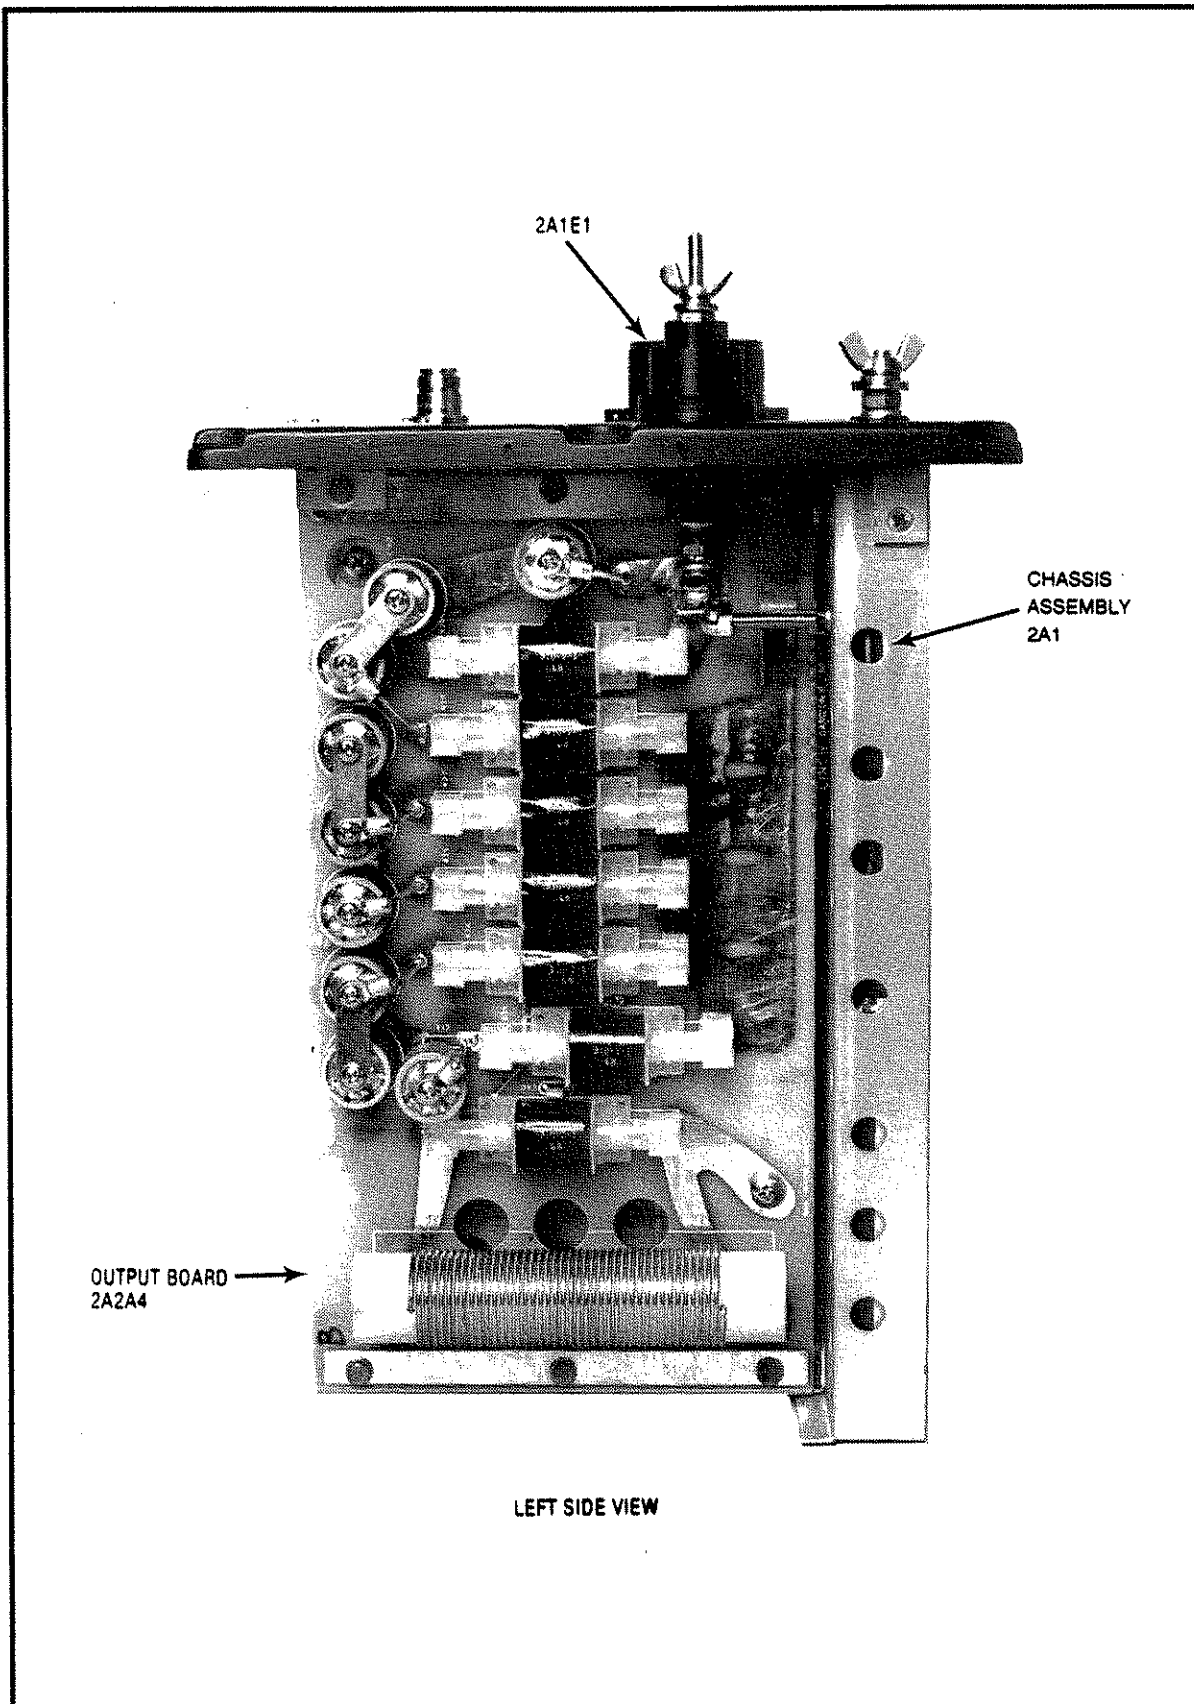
Major Assembly and Component Locations (Left Side View).
